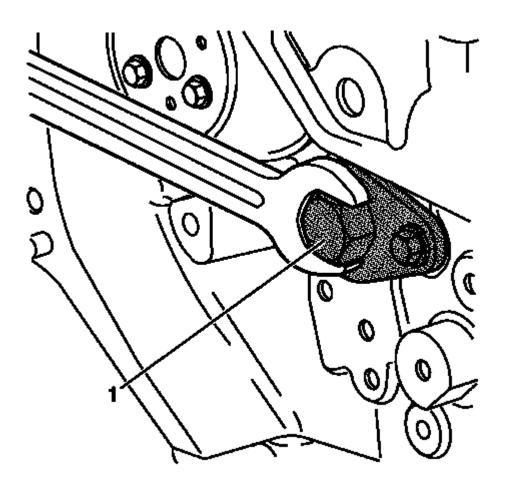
Installing Balance Shaft Bushing Courtesy of GENERAL MOTORS COMPANY
